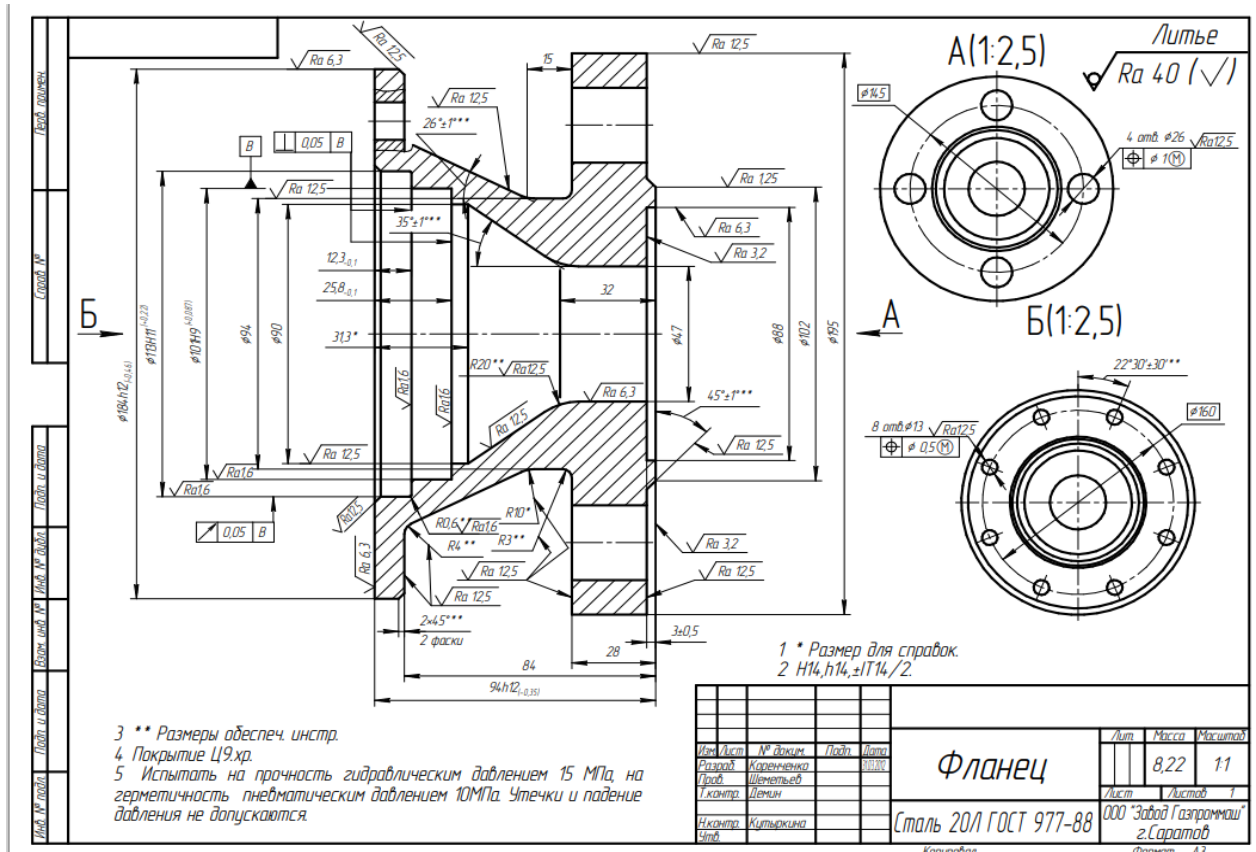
Examples of design drawings of machined parts (“GAZPROMMASH” LLC) (part 2)
